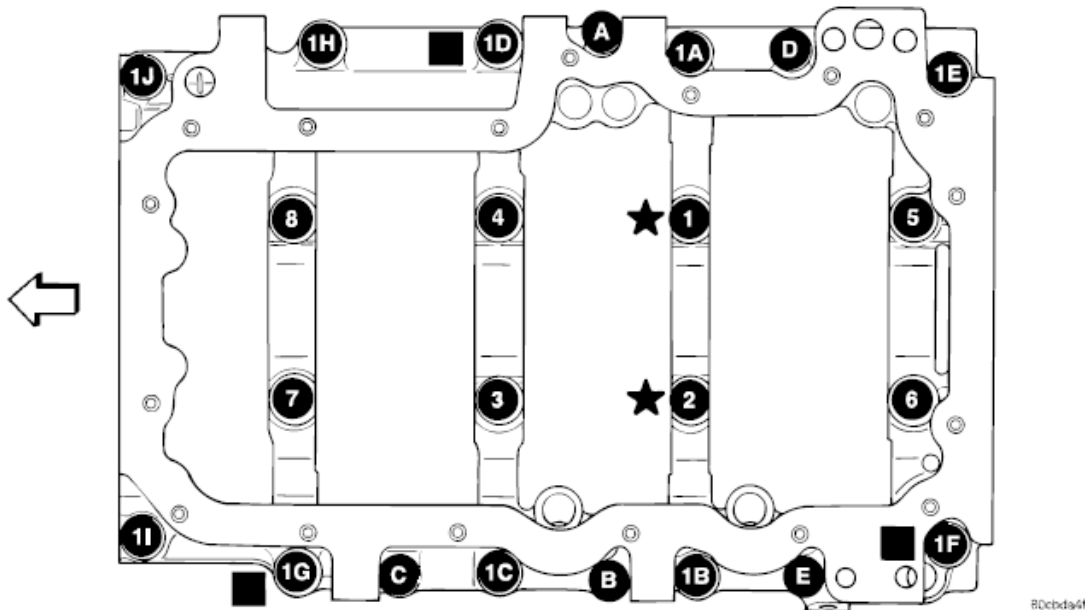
Identifying Installation Sequence Of Bedplate Retaining Bolts
